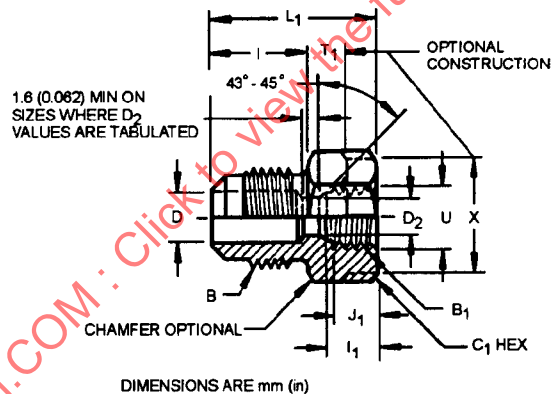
INTERNAL FLARE TO EXTERNAL FLARE REDUCING ADAPTOR
